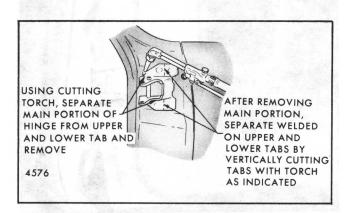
Body Side Hinge Strap Removal - "X" Styles
